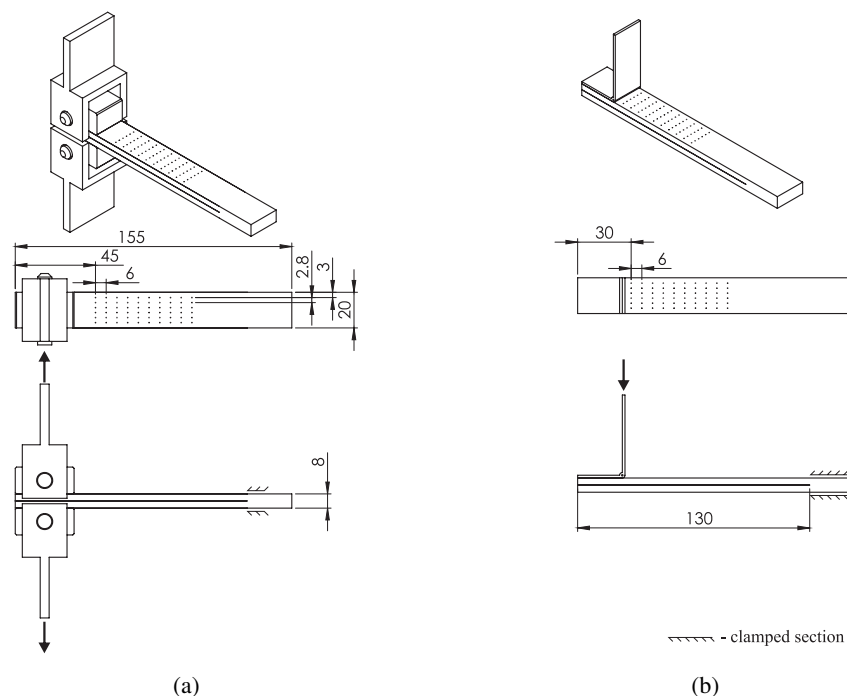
Sketches of (a) DCB and (b) ELS specimens. A 130 mm pre-crack is introduced.
